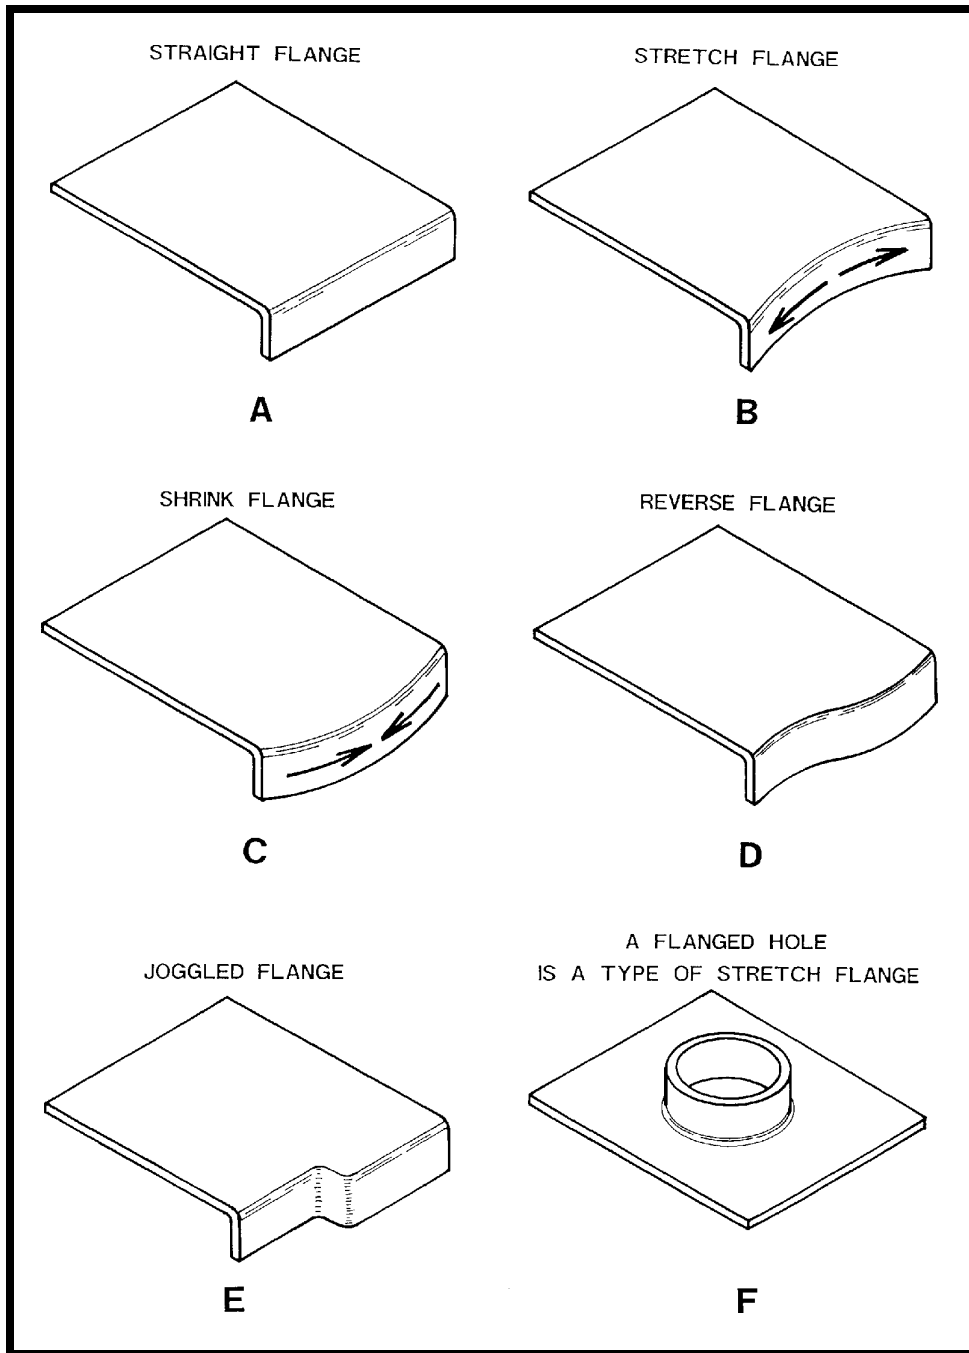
Examples of types of flanges: a straight bend or flange (A). A stretch flange (B). In shrink flanges the metal is compressed (C). A reverse flange is a combination of a stretch and shrink flange (D). A jogged flange (E). A Flanged hole is a type of stretch flange (F). *Smith & Associates
